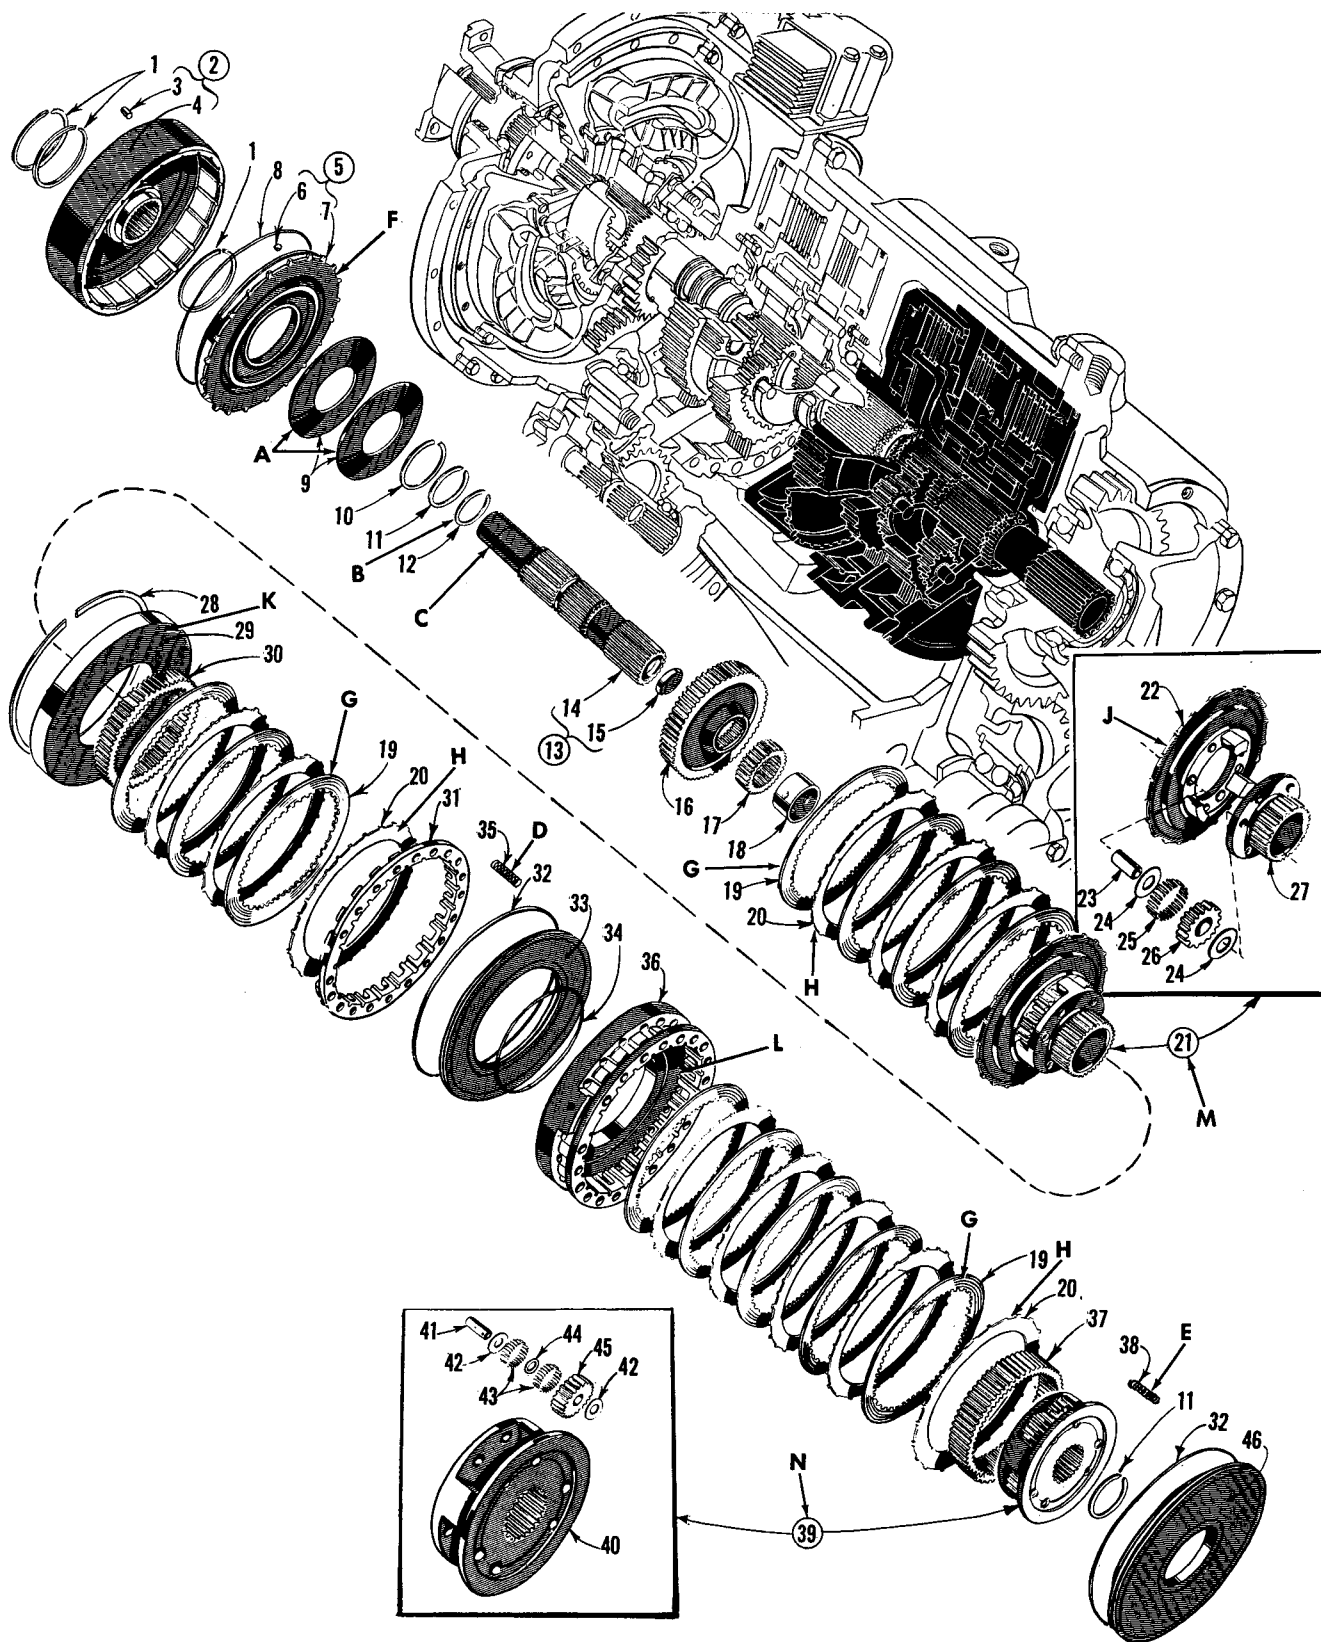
Intermediate-, high-, and low-range clutches, high- and low-range planetary carrier assemblies, and intermediate-range clutch drum, exploded view
